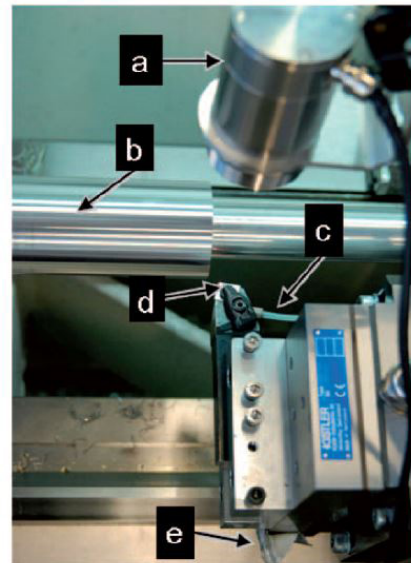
Experimental set-up of the internally cooled tool on the CNC lathe: (a) pyrometer, (b) work-piece, (c) coolant outlet, (d) cutting tool, (e) coolant inlet [7].
